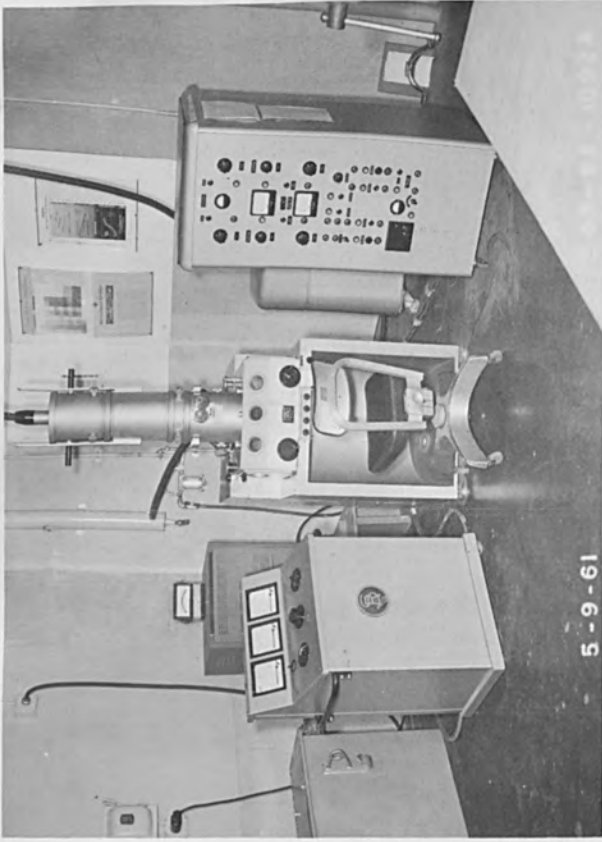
High Voltage Electron Beam Welding Machine.
